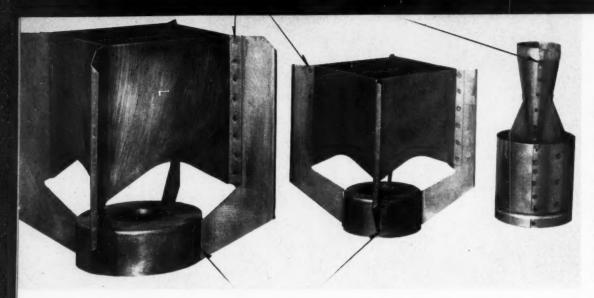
Left — Larger bomb tail-fin units than shown in Fig. 2. Spot welds are indicated on sheet metal stampings
